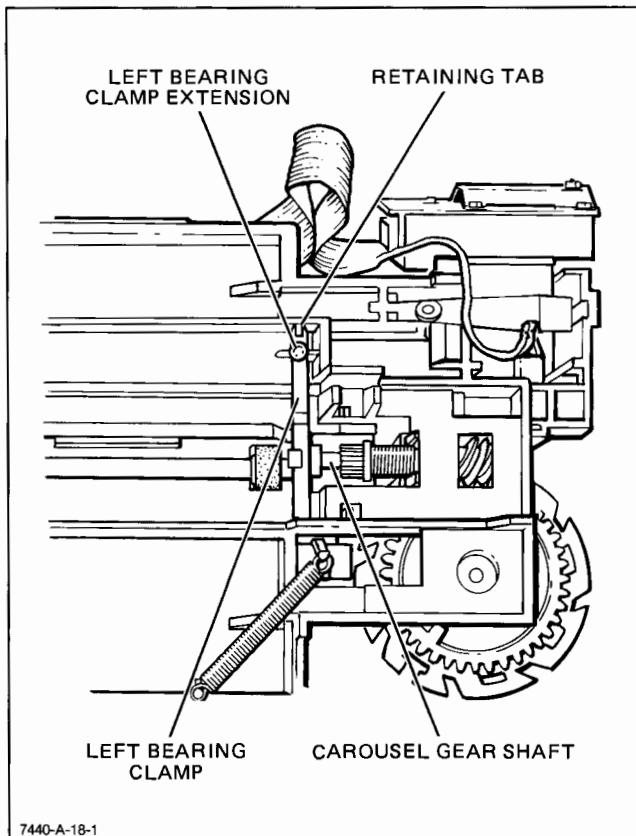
Grit Wheel Assembly Removal, Detail A
